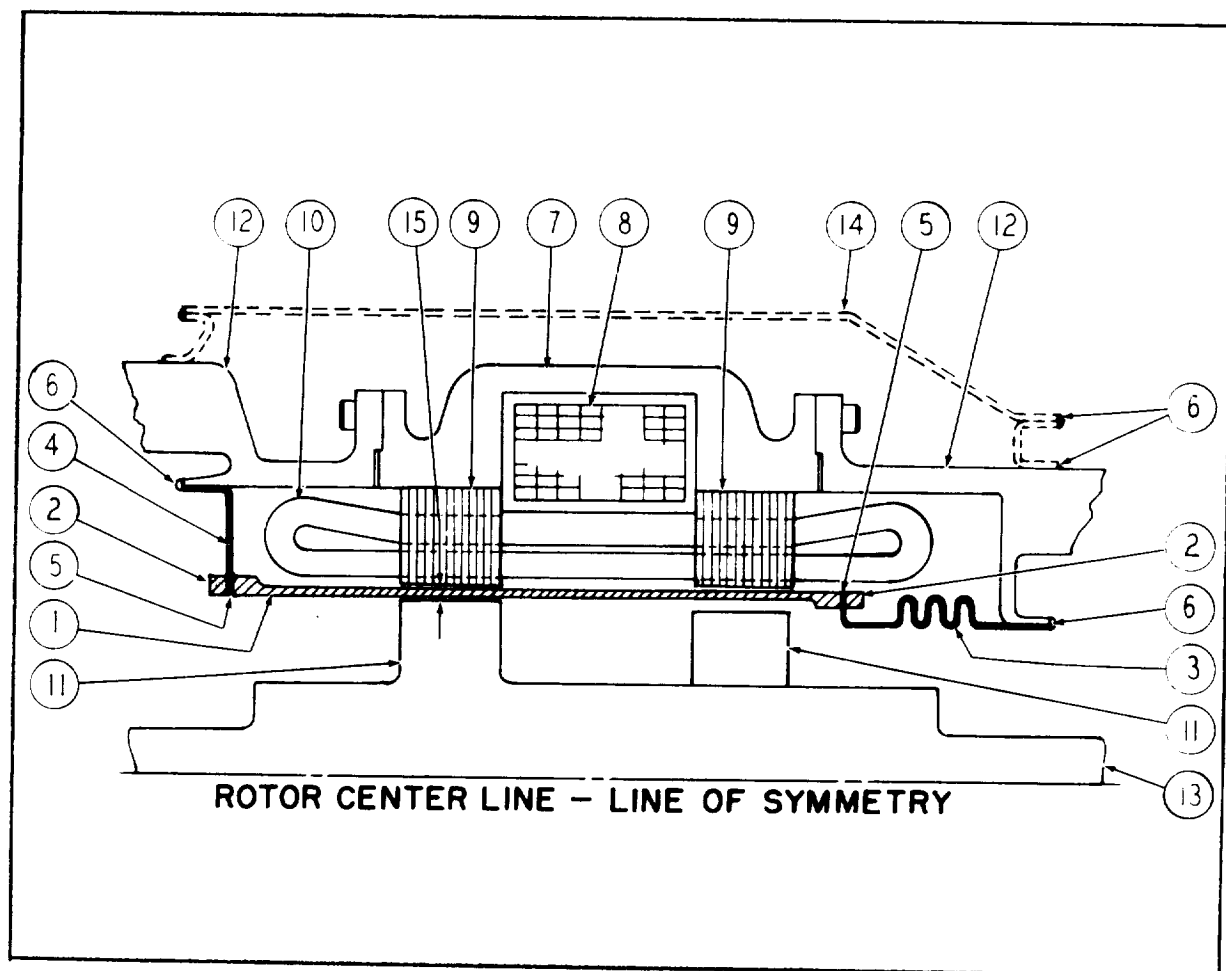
Bore Seal Assembly, Radial Gap Inductor Generator
